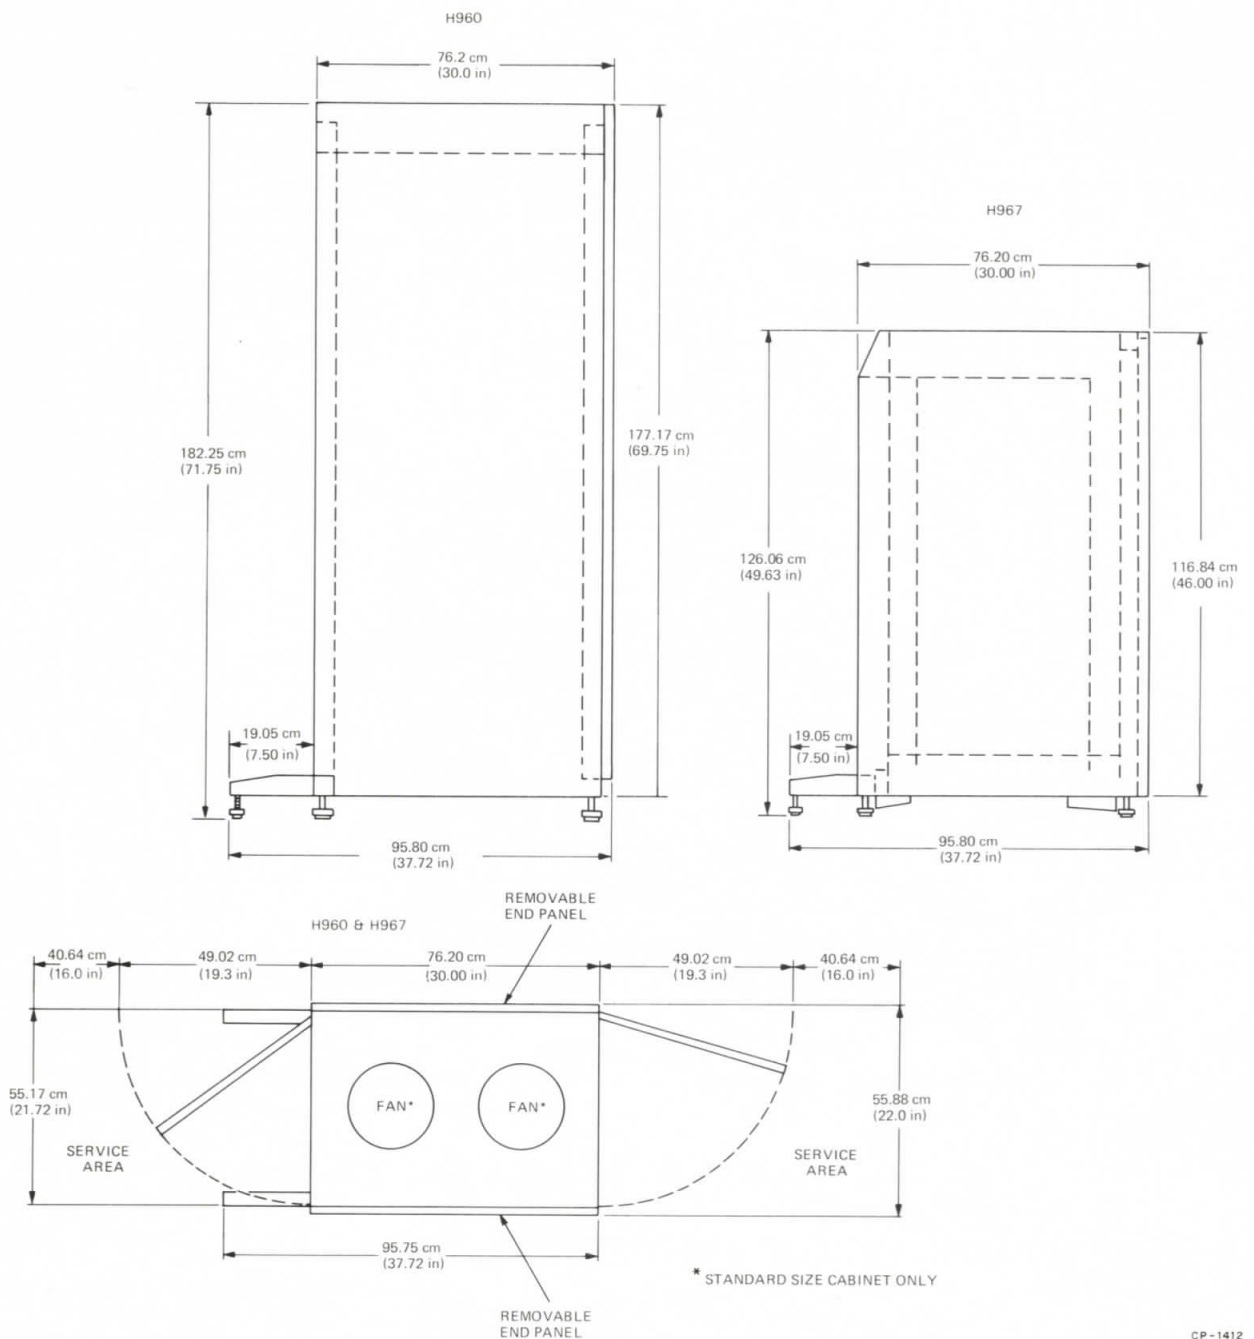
Standard (H960) and Short (H967) Cabinet Clearance Dimensions
